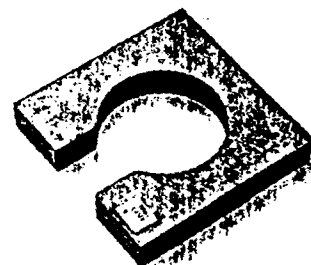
shows an example of thick plate cutting and PHOTOS 3 and 4 explain cut surface of thick plates.
